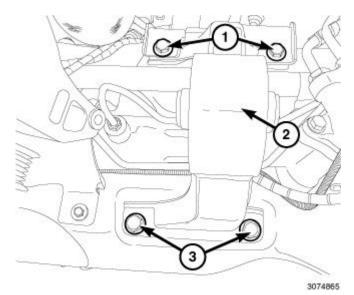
Rear Mount Isolator & Bolts Courtesy of CHRYSLER GROUP, LLC
